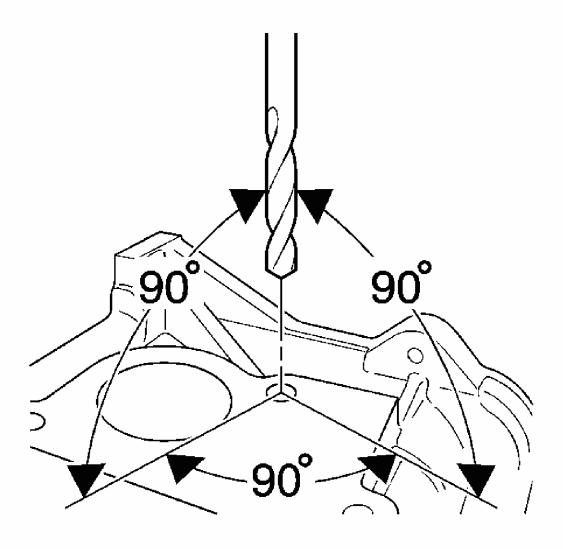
Identifying Proper Drilling Angle Courtesy of GENERAL MOTORS CORP.
